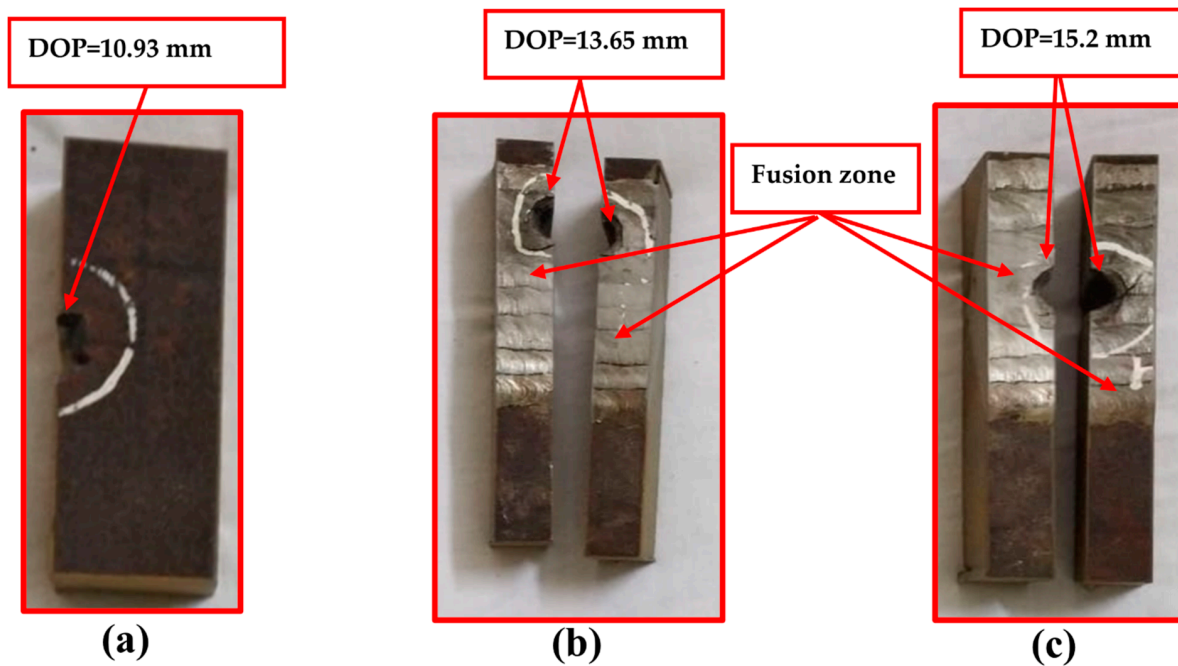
7.62 AP bullet penetration cut section of (a) base metal, (b) weldment-1, (c) weldment-2.
